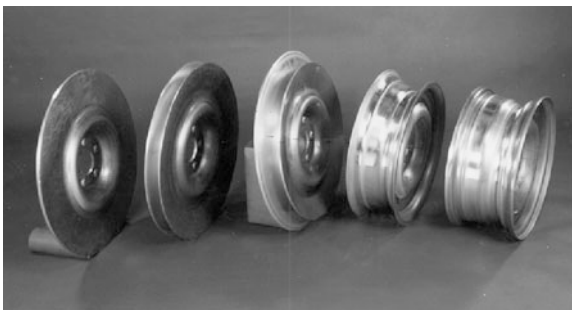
One-piece aluminium split-rim wheel (*source* Leifeld Metal Spinning GmbH)
